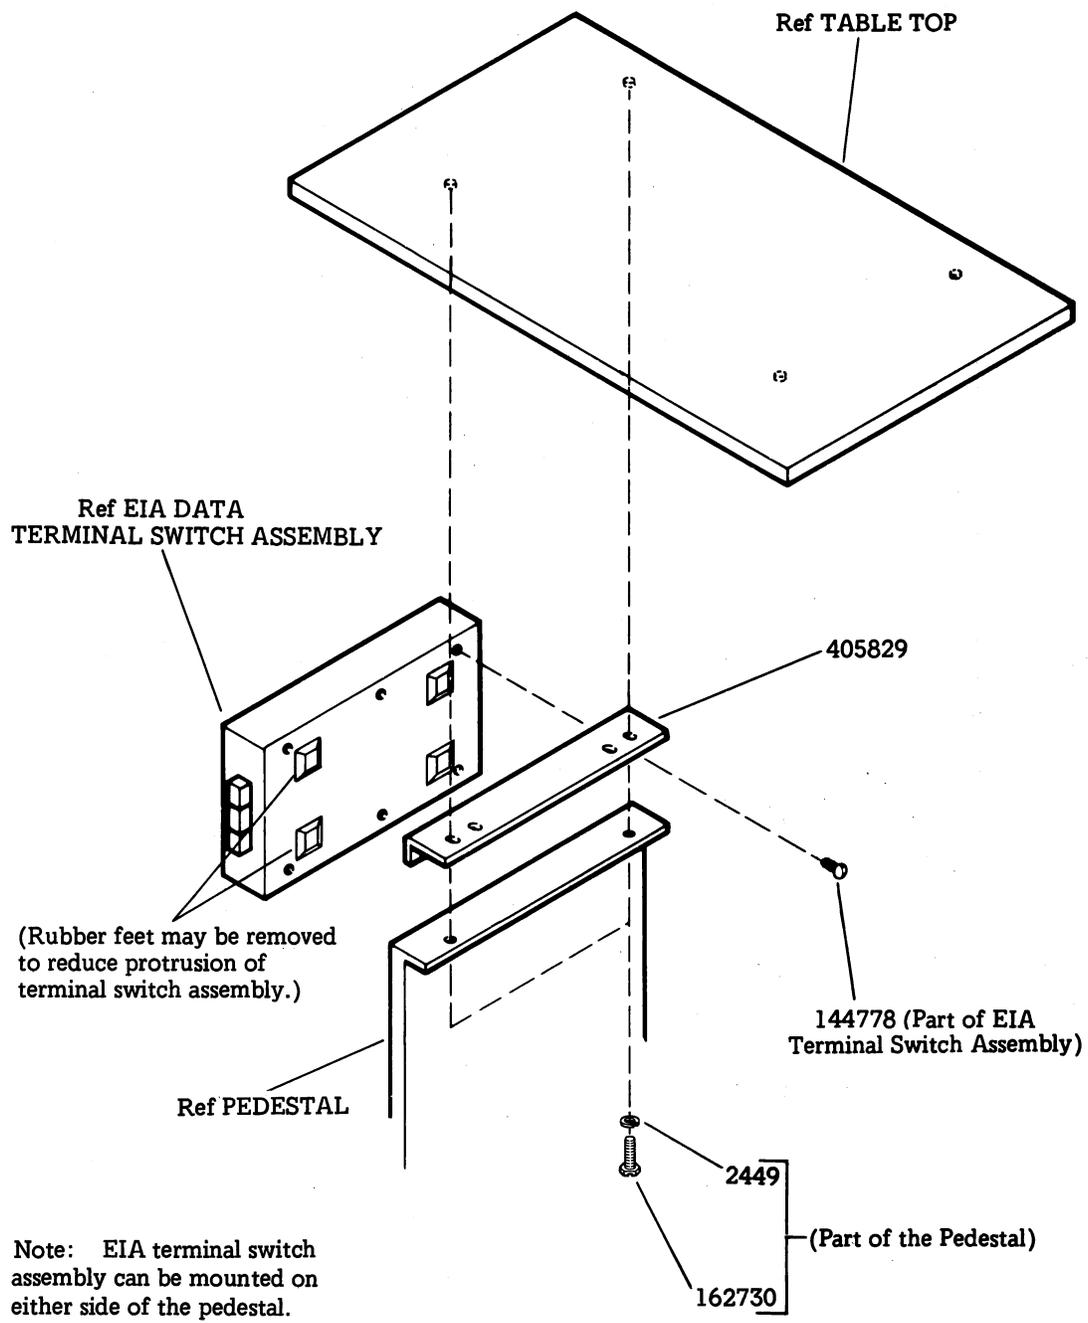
Mounting for the 345630 EIA Terminal Switch Assembly
